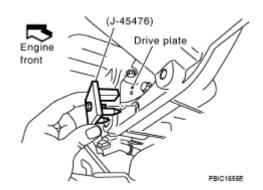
Identifying Rear Plate Cover Courtesy of NISSAN MOTOR CO., U.S.A.
